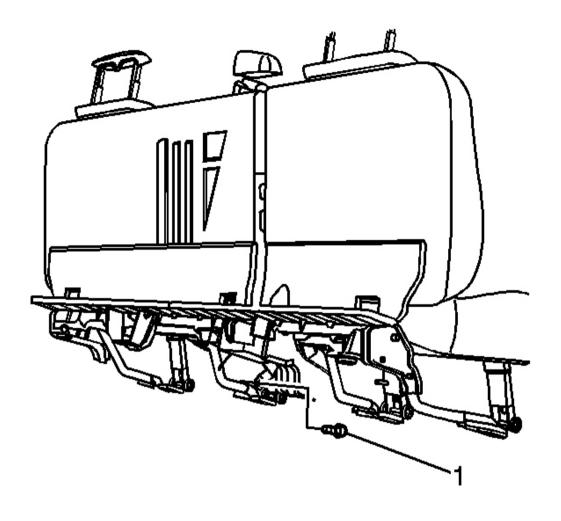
Seat Belt Anchor Bolt Courtesy of GENERAL MOTORS CORP.
